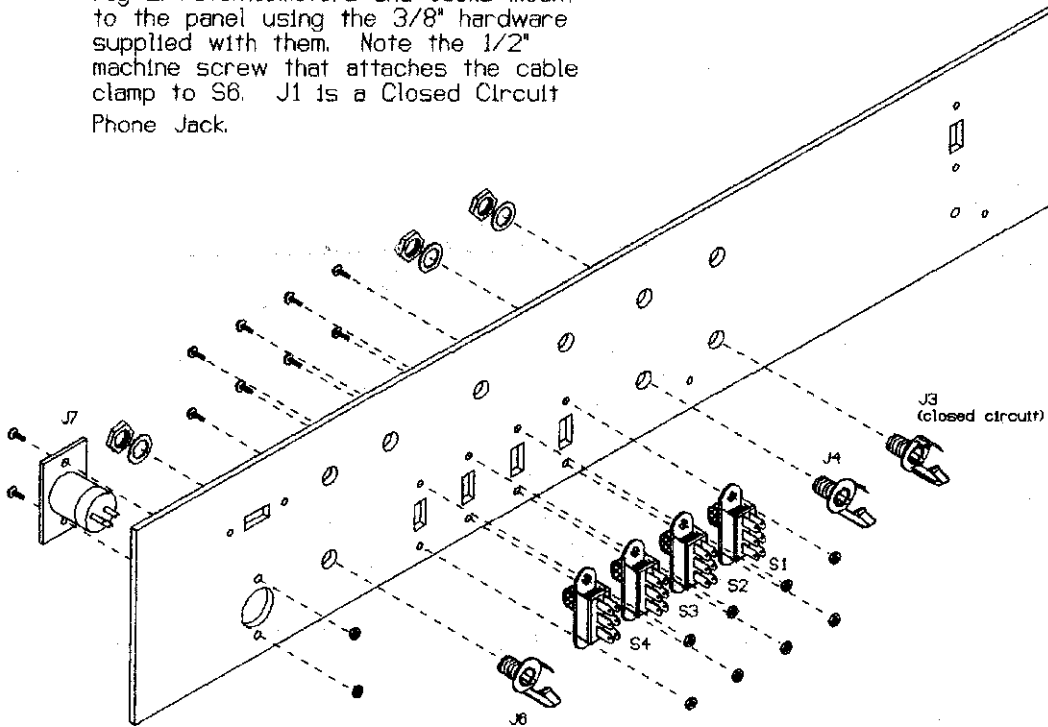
1/4" machine screws are used to mount the slide switches and XLR connector J7. Note that J3 is a Closed Circuit Phone Jack.
